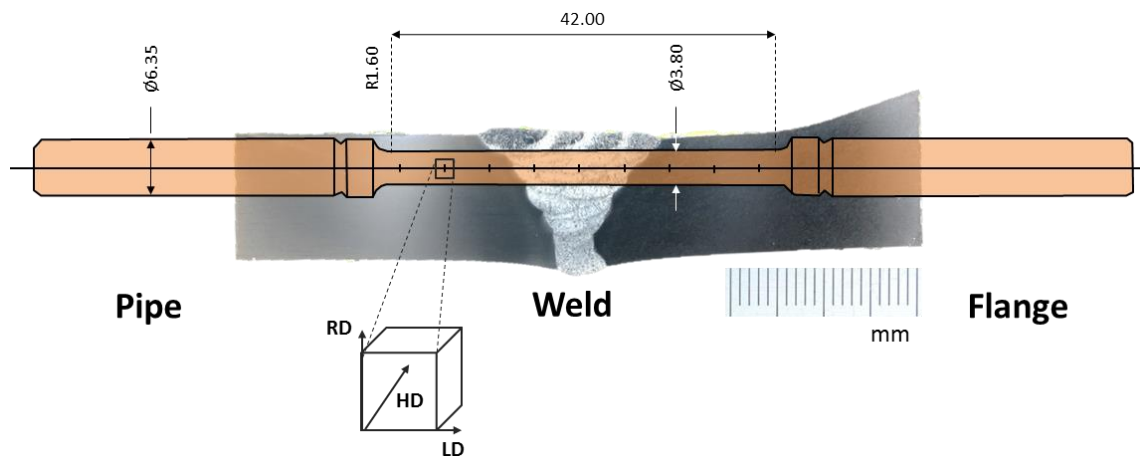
Geometry and dimensions (mm) of the tensile specimens with the location of the measurement points along the cross-weld tensile specimen in relation with the component.
